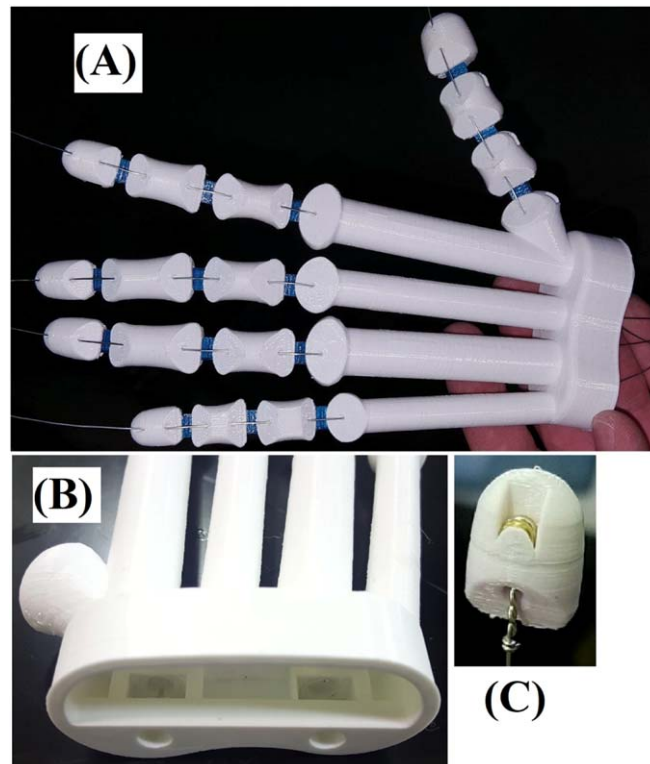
(A) 3D printed finger phalanges connected with flexible TPU joints and assembled to the palm structure. (B) Square nut cavities in carpometacarpal space. Two sets of screws and nuts connect the palm structure, wrist attachment and forearm central plate together. (C) Cavity in the distal phalange to host the steel wire crimp.
